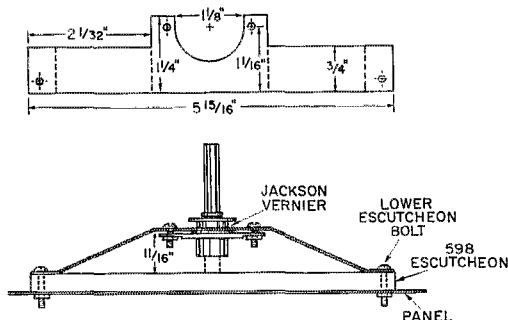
Scale drawing of mounting plate for vernier drive. Exact locations for escutcheon mounting holes can be determined by temporarily mounting the vernier drive and plate on the 598 dial shaft. In the complete assembly the recessed dial knob covers the vernier. Use a 1/8 inch socket punch to form the center cut-out.
